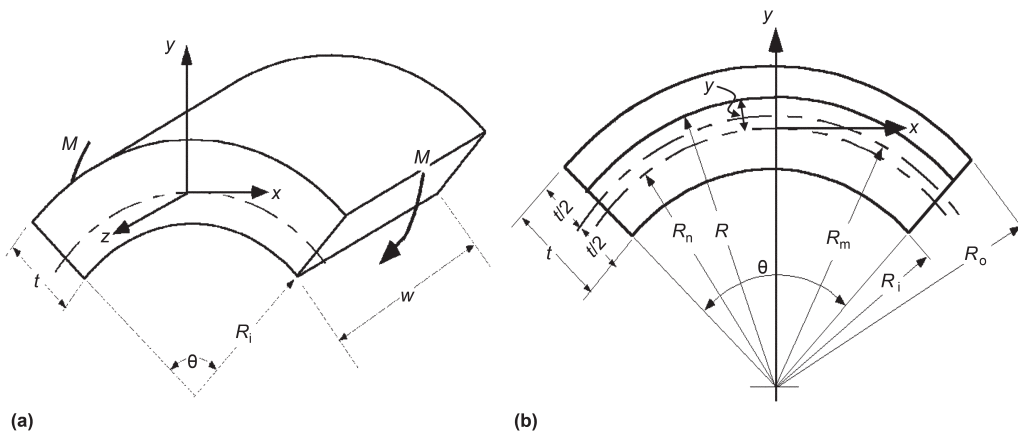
Geometric variables used in the analysis of sheet bending. (a) Overall dimensions. (b) Dimensions used in bending analysis
